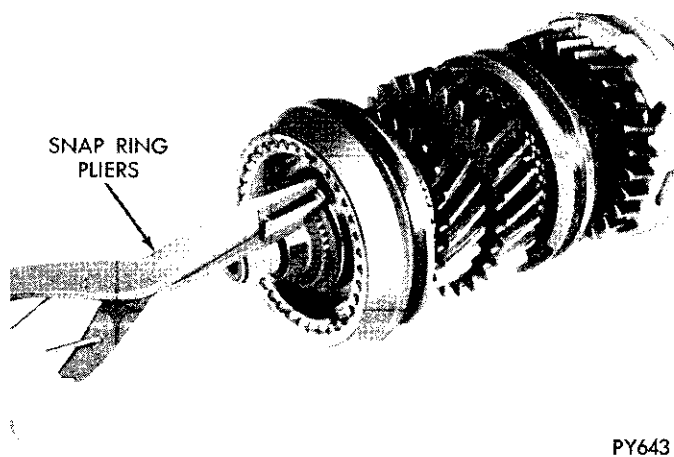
Snap Ring—2nd-3rd Synchronizer Clutch Gear to Mainshaft—Removal or Installation
